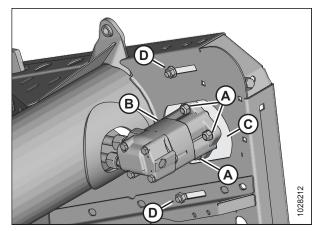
Knife Drive Motor – Double-Knife Header View from Rear
